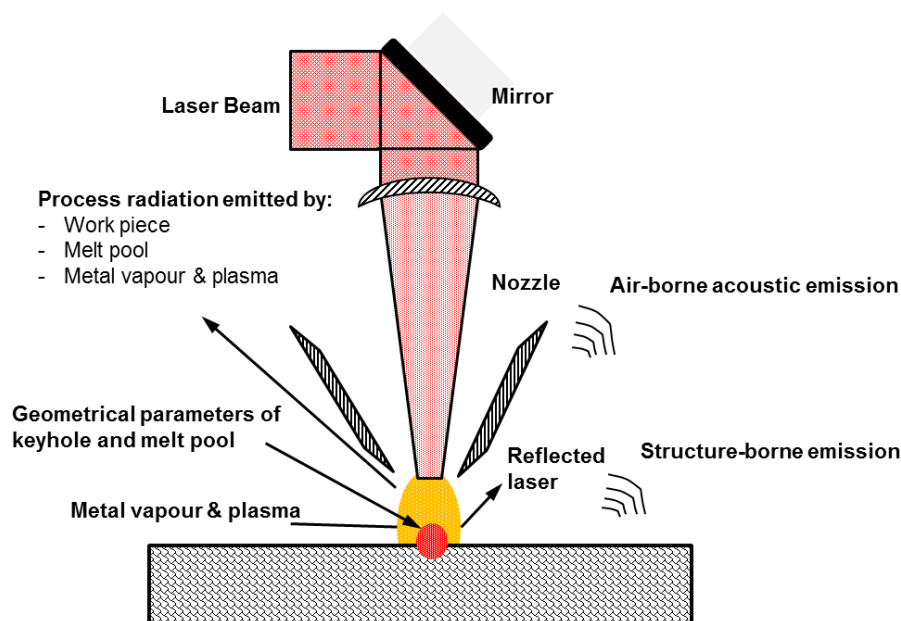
Process signals during laser welding(Duley, 1999)
